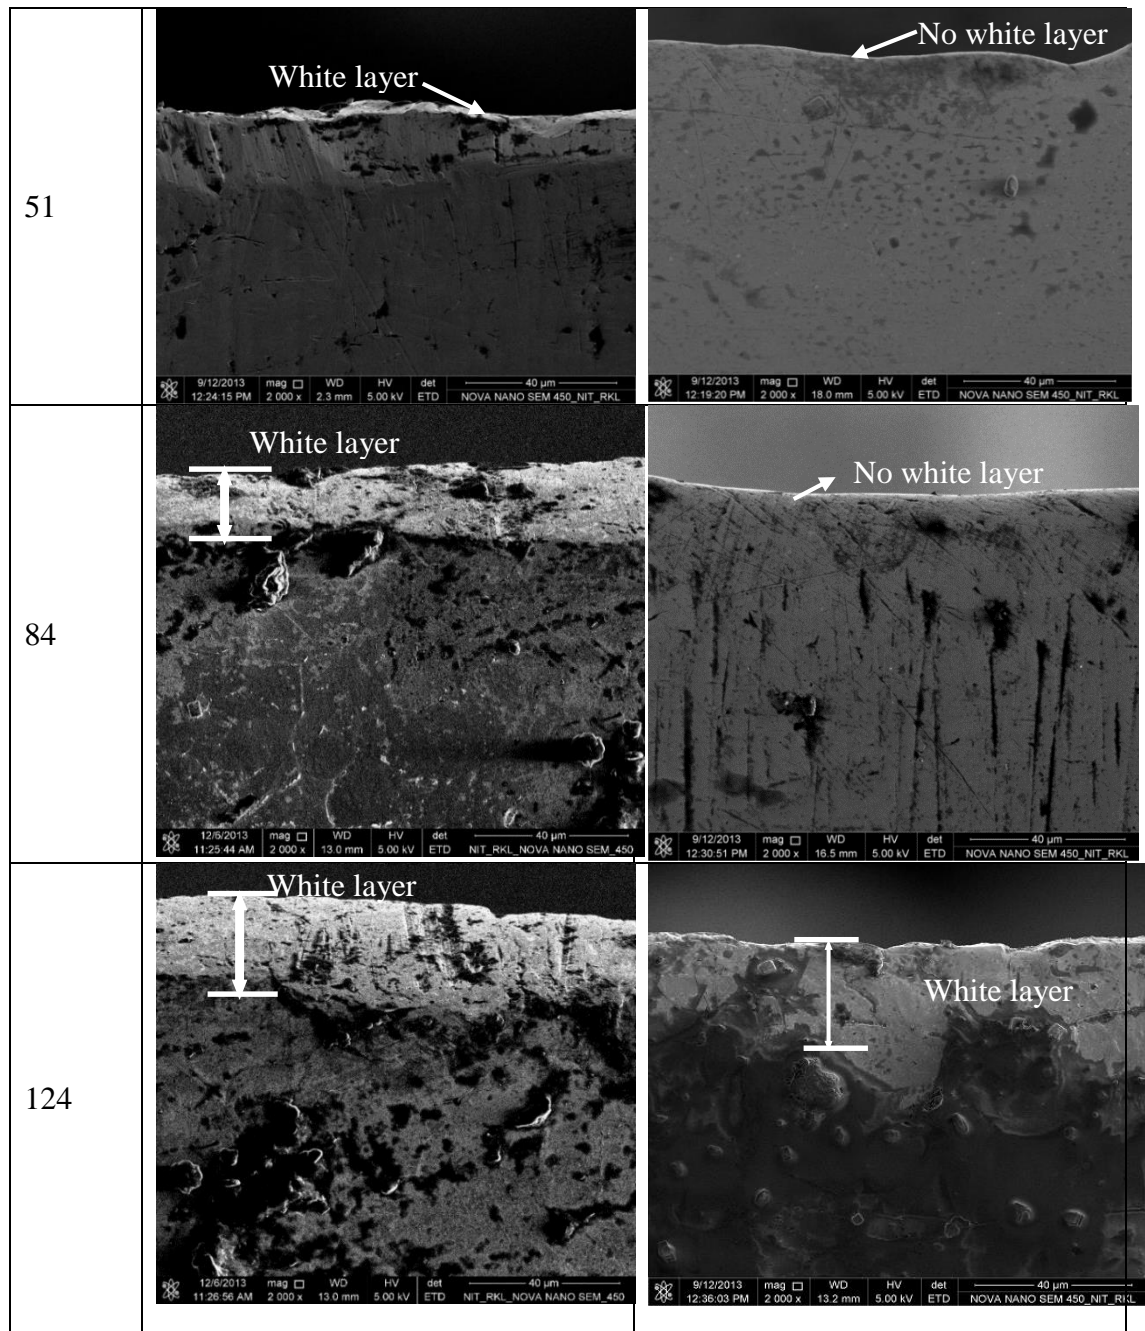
FESEM images of surface and sub-surface region of cross section of machined part for different cutting speeds after machining with uncoated and CVD multilayer coated carbide tools.
